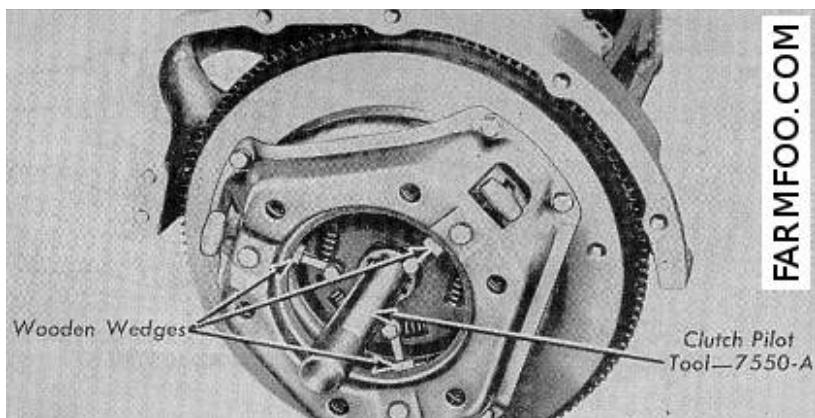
Using wooden wedges and dummy shaft to facilitate R&R of clutch. Clutch installation on models 2N-8N-9N.
